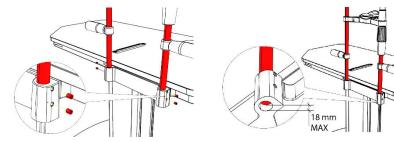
Loosen the grub screws of the chin rest Fig. 33 - Maximum adjustment height of the rods
